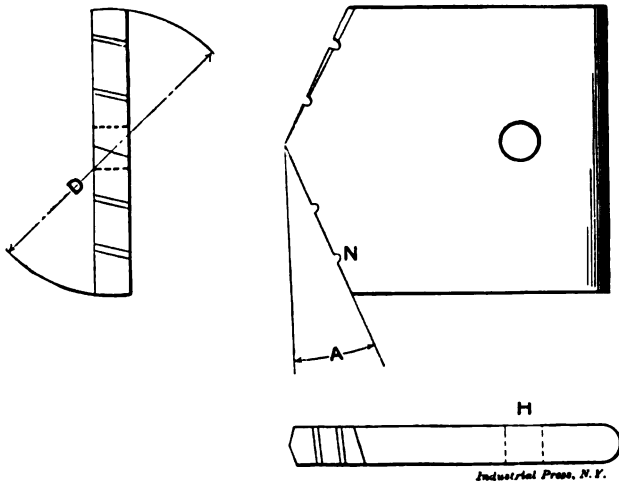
Detail of Blade Inserted in Drill in Figs. 34 and 35
